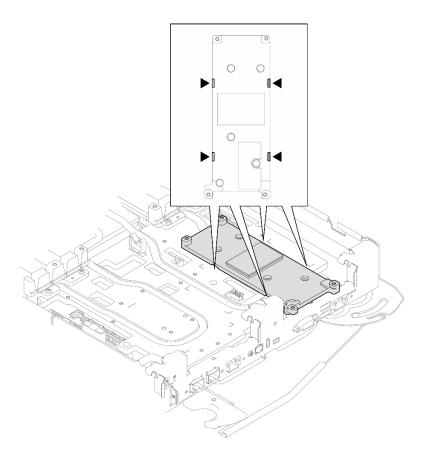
Locations of openings on the bottom side of the OPA 400 riser assembly interface plate
